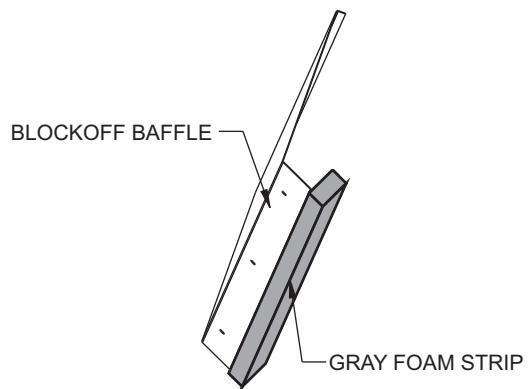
Adding Foam Strip to Block-Off Baffle
